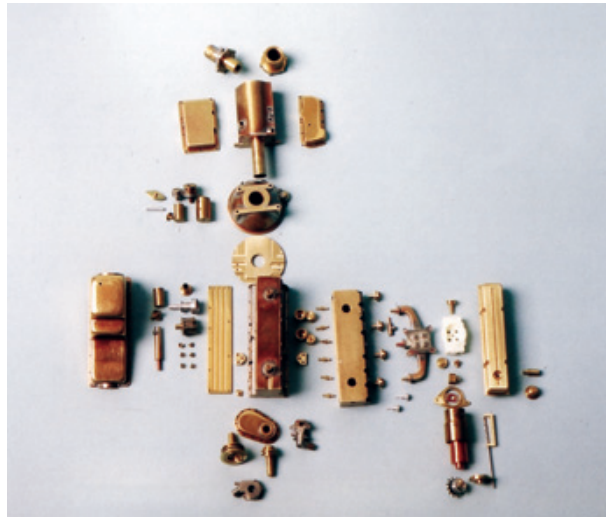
The DT<sup>2</sup> engine can only be assembled authentically if it uses pins to positively locate the many parts. The machined intake manifold will attach to the machined intake ports on the engine block. Small shafts are inserted into the intake manifold. The outside diameter of the pin is the inside diameter of the “receivers” in the engine block and in the intake manifold. When finished, the individual exhaust manifold flanges will attach to the exhaust ports so that the dimensions of each part and their relationship to other engine and adjacent parts are “set” to insure repeatability and accuracy of fit. Mounted into a machined receiver on the engine block (with the intake ports alternating with the exhaust ports), the intake manifold fits in the same place every time. The valve cover features an incut line to mimic a similar design on the hood and bed cover. With the engine bolted to the engine mounts, parts fitment and related construction issues can be addressed throughout construction so final assembly will go smoothly.
